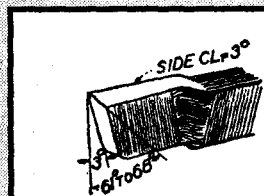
Increasing the angle of the cutting edge on a side finishing tool will often stop chatter, provided the tool and the work are clamped tightly.
